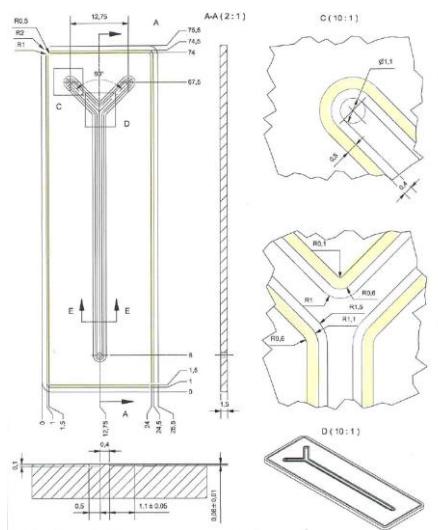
Design example of a channel plate for POC cartridges manufactured using injection molding
